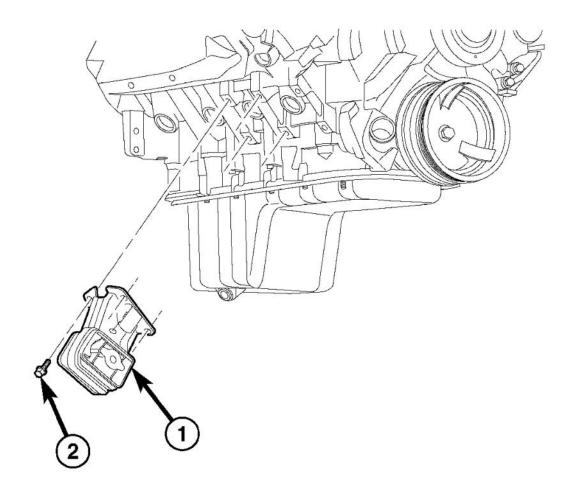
Removing/Installing Engine Mount Courtesy of CHRYSLER LLC
